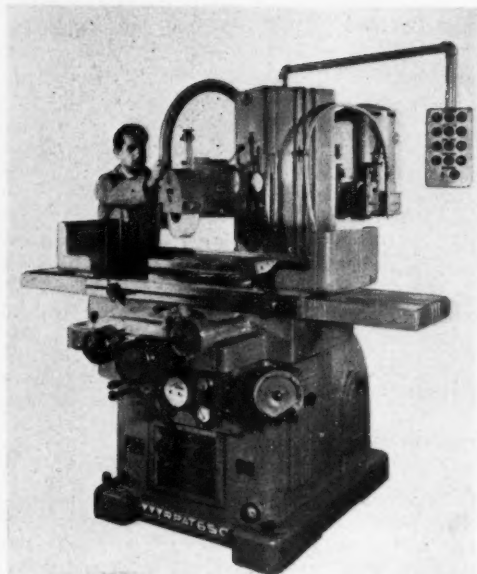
Zocca type RPAT hydraulic surface grinder with peripheral wheel and vertical cup wheel spindle heads on an indexing column
